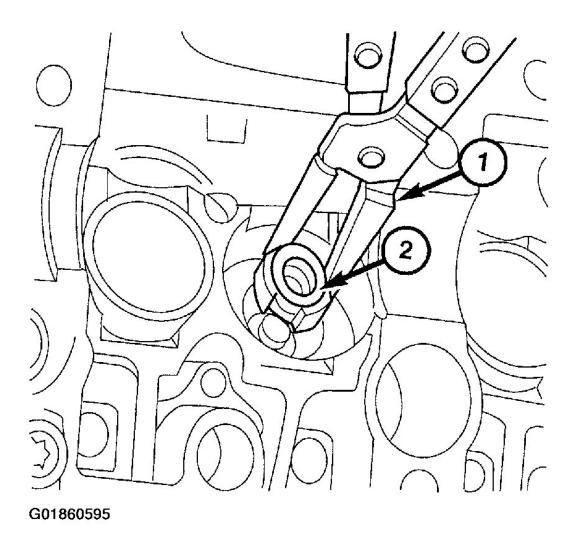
Removing Collets, Releasing Valve Spring Compressor & Removing Valve Retainer & Valve Spring With Spacer
